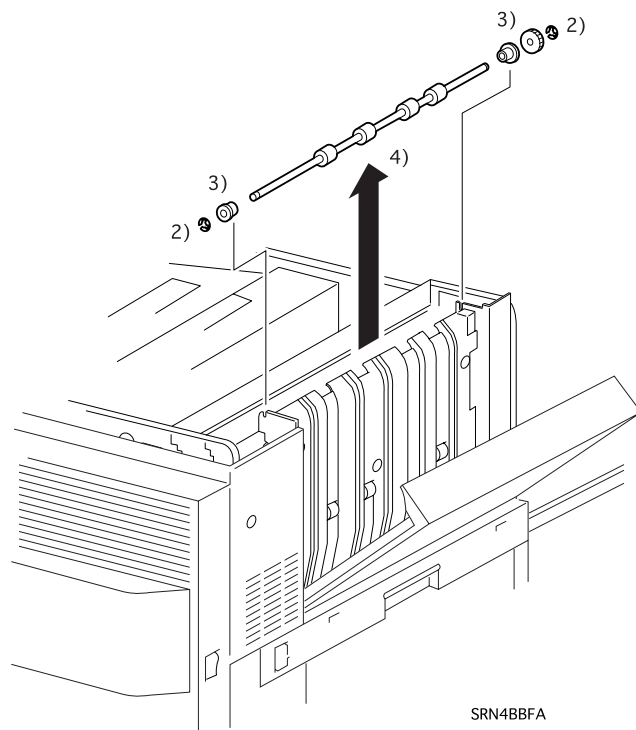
EXIT-3 ROLL ASSEMBLY Removal
